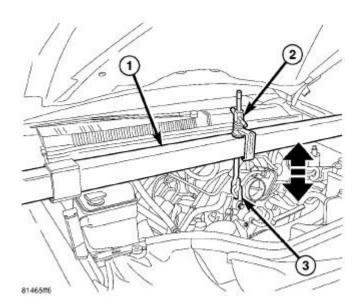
ENGINE SUPPORT TOOL Courtesy of CHRYSLER LLC
